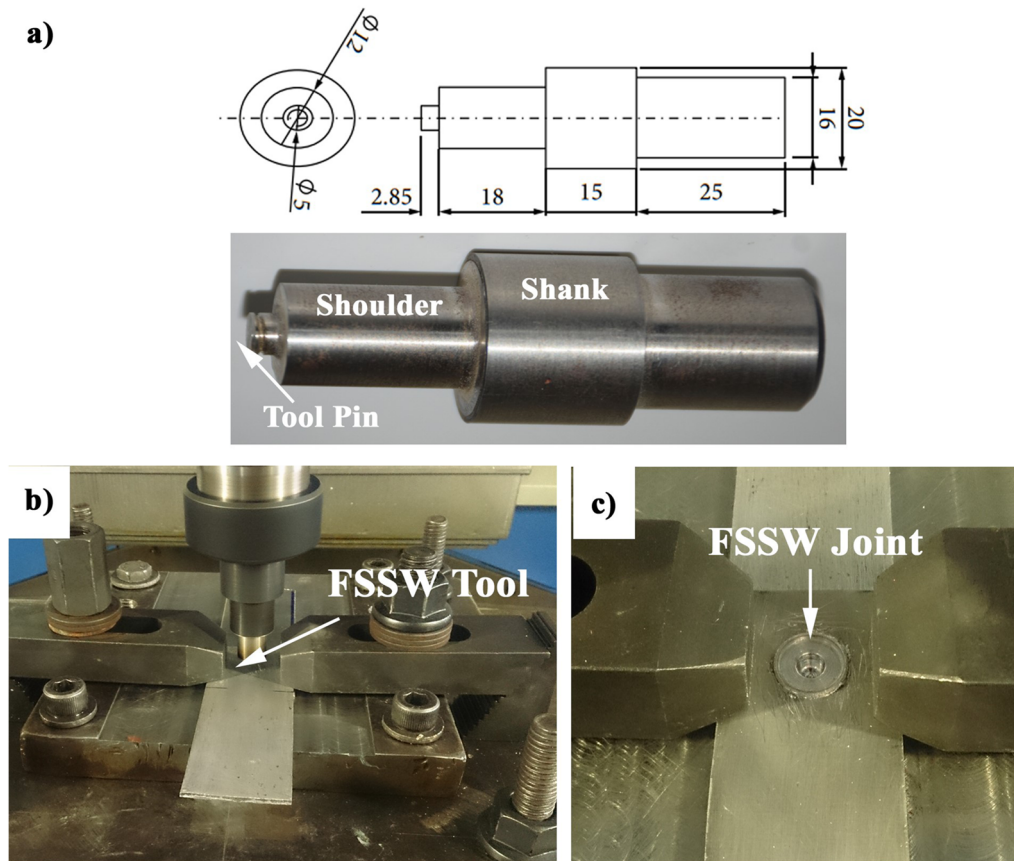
(a) Schematic drawing and image showing the FSSW tool (dimensions in mm), and (b–c) FSSW experimental set-up.
